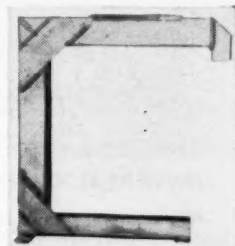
Welded Steel Design is stronger, more rigid yet weighs only 38 pounds. Weldment costs 33% less than original casting. Eliminates considerable time in machining and assembly.
